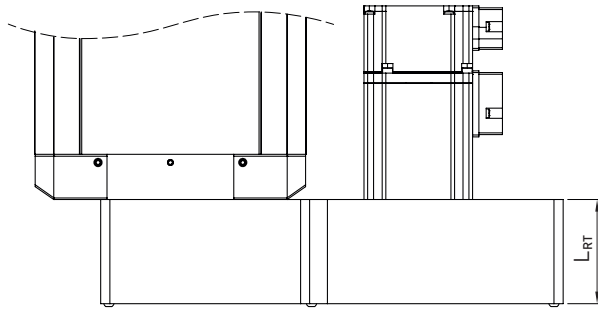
Motor connection of linear tables HT-S with belt drive
